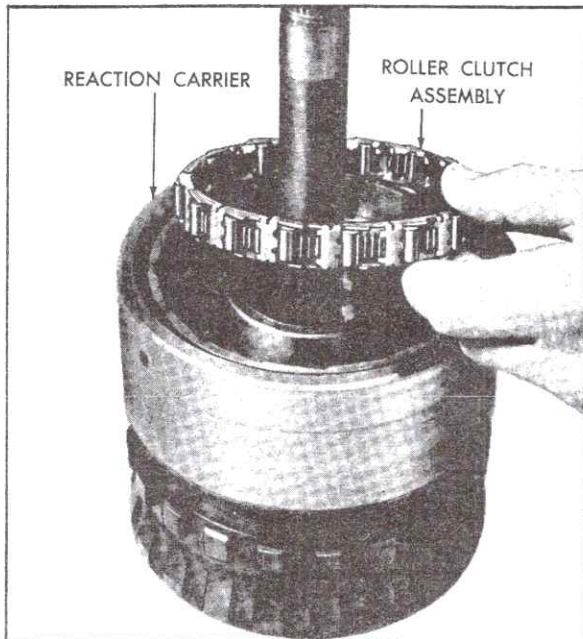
Installing Roller Clutch in Reaction Carrier
